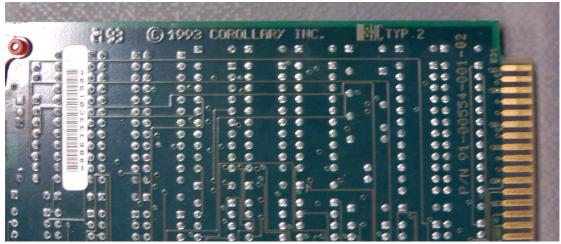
Corollary XM spare CPU card (4) bottom closeup "Copyright 1993 Corollary Inc S/N: 886333C0190, P/N: 91-00554-001-02"
